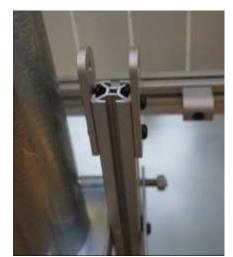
Semicircular end piece removed and attached to PV frame.
